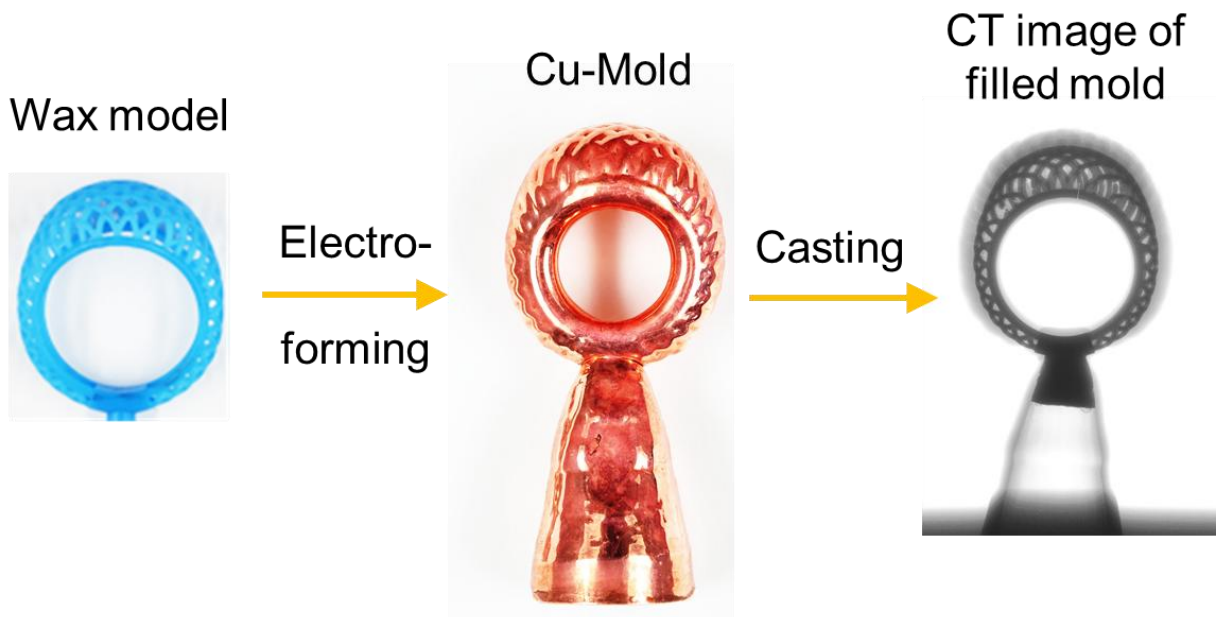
New casting technique with lost metal molds: wax model (left), galvano-formed copper mold (center) and CT image of a filled copper mold (right)
